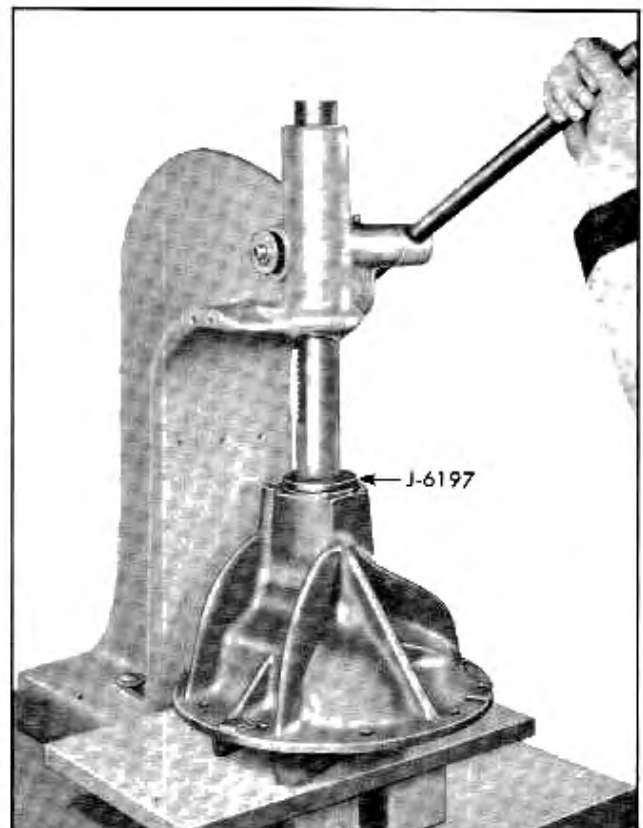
Installing Front Bearing Outer Race With Installer J-6197
